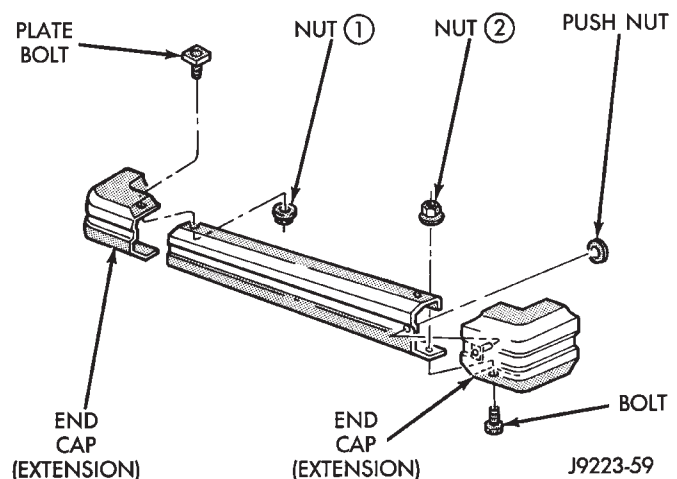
Bumper End Cap Removal/Installation—XJ Vehicles
